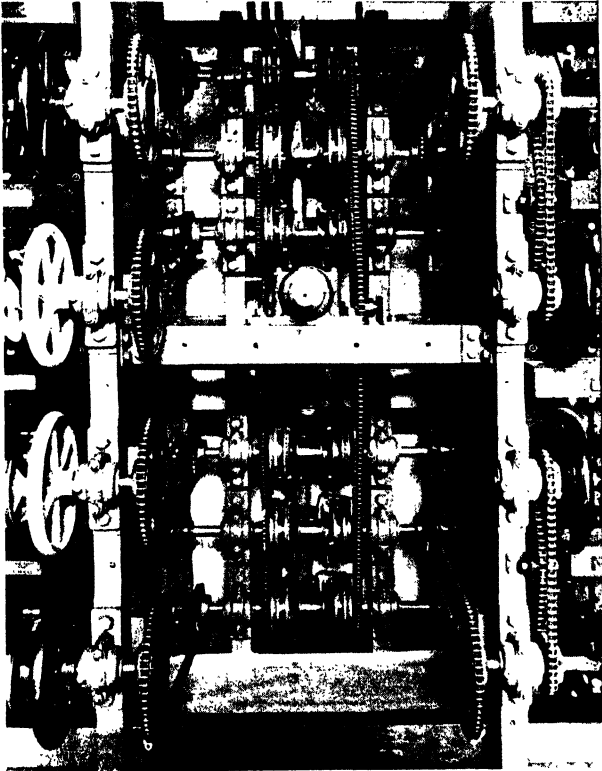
ELECTRO-MAGNETIC CLUTCH GRAND MASTER WITH COVERS REMOVED
